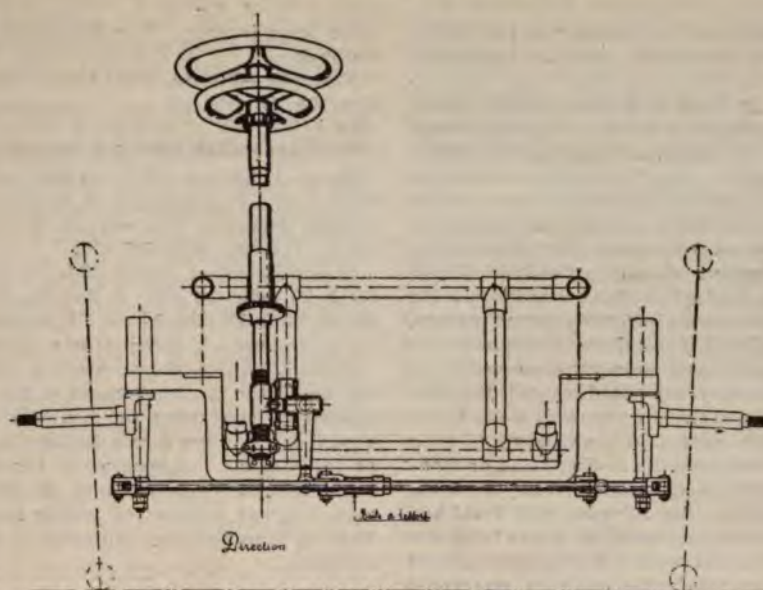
FRONT ELEVATION OF STEERING GEAR.
